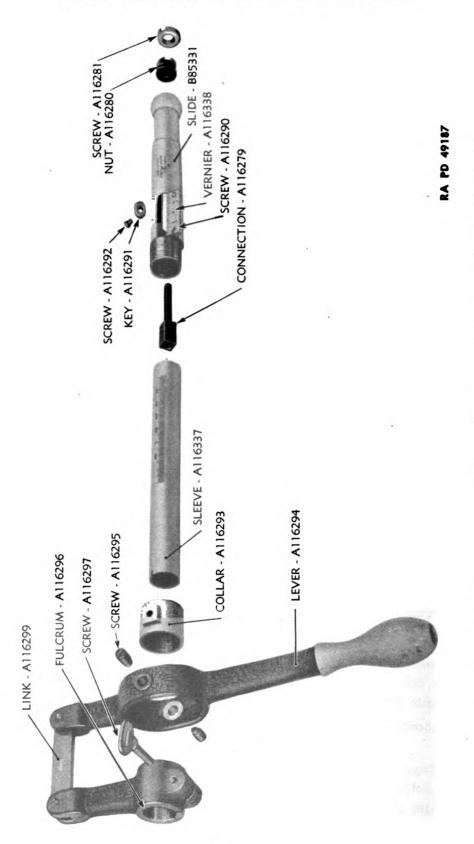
Exploded View of Handle, with Slide, Assembly (2-inch Star Gage)
